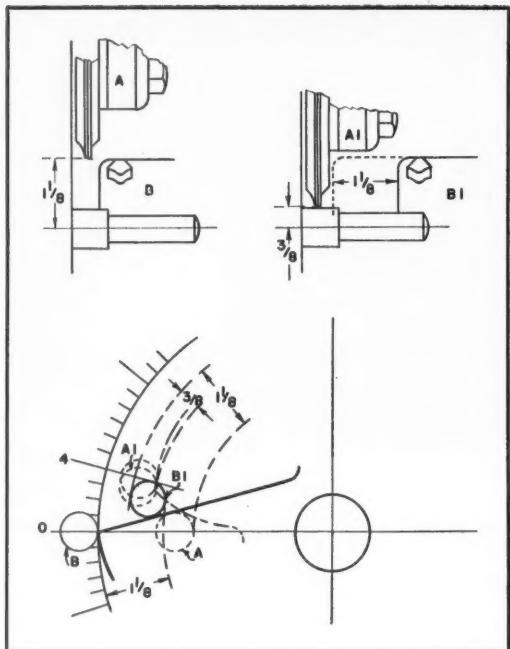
Diagram Illustrating Method for Establishing the Clearance Between the Box Tool and Front Cross Slide Tool
